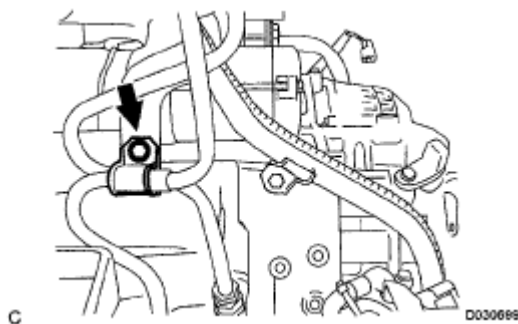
Locating Oil Cooler Tube Clamp Bolt
